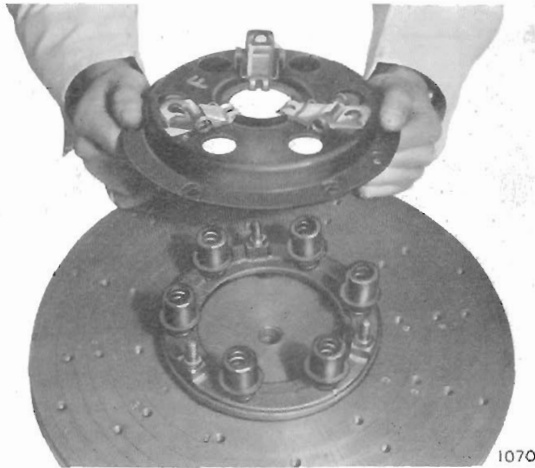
Removing clutch cover assembly (Herald and Spitfire)
